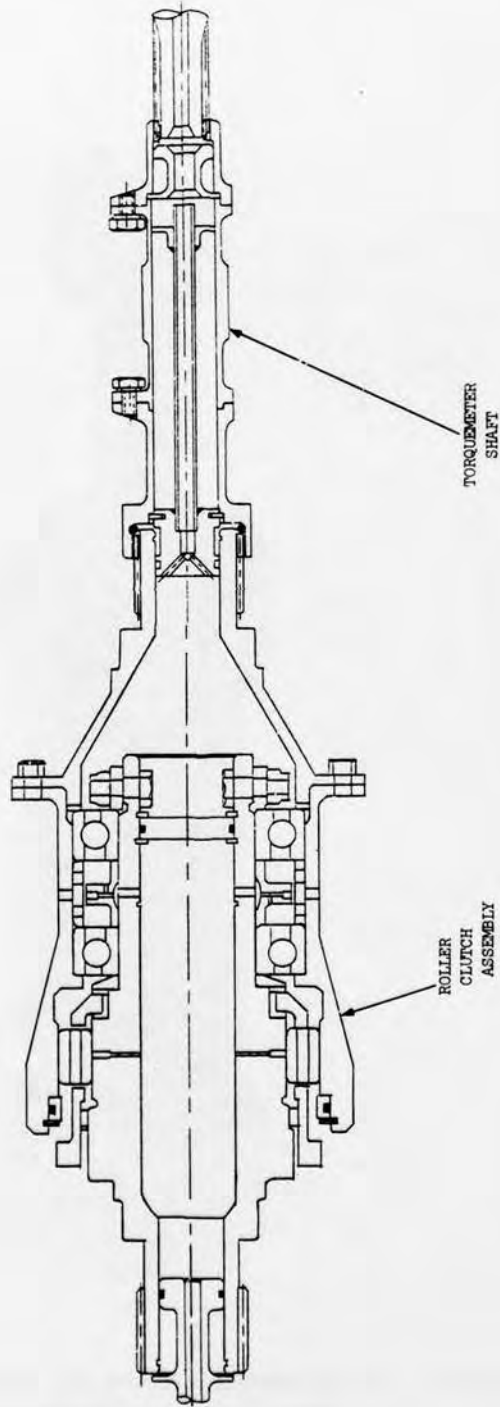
Torquemeter Shaft Assembly in the Steam Turbine Test Rig.
